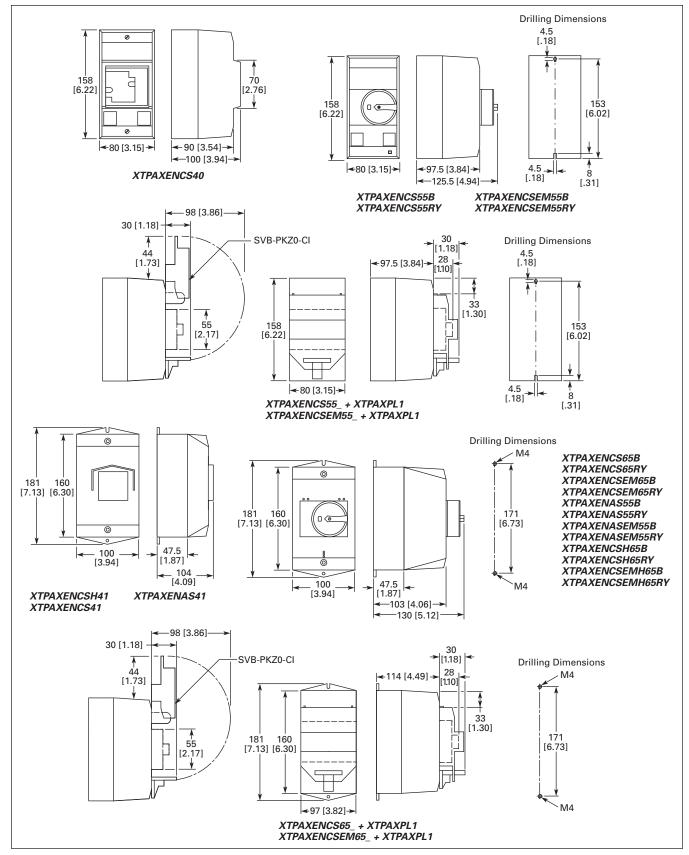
Insulated Enclosures for Surface Mounting of XTPR...B Manual Motor Protectors (Approximate Dimensions in mm [in])
